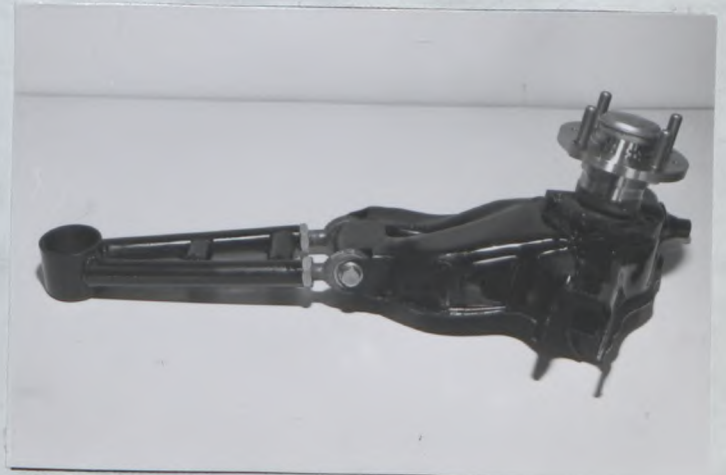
REINFORCED TRAILING ARM TYPE 2
